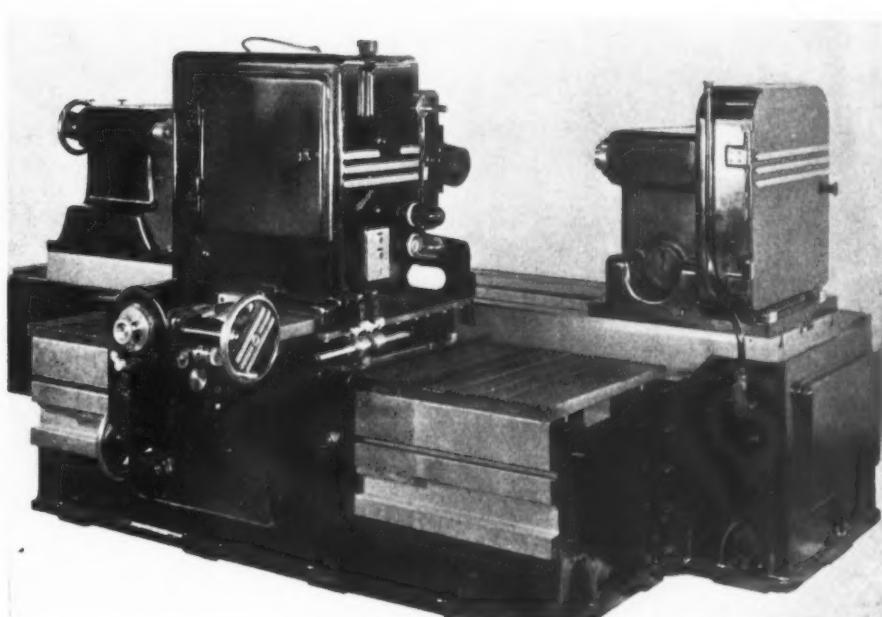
Control Side of Gear-shaving Machine Shown in Fig. 1
